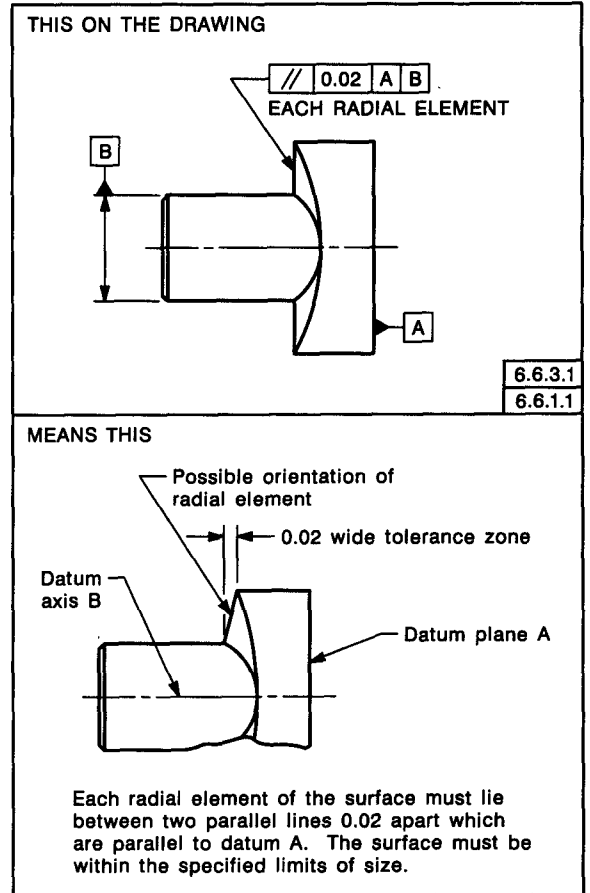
SPECIFYING PARALLELISM FOR A RADIAL ELEMENT OF A SURFACE
